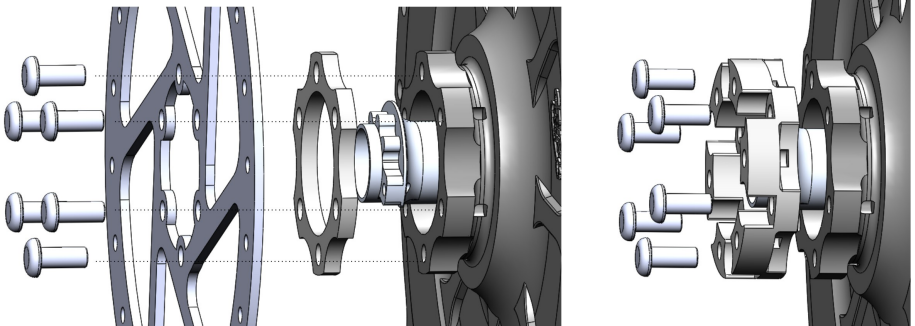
Narrow disc spacers (left) fit behind rotor. Wider spacers (right) bolt independently to motor, and present separate threaded holes for disc bolts.
